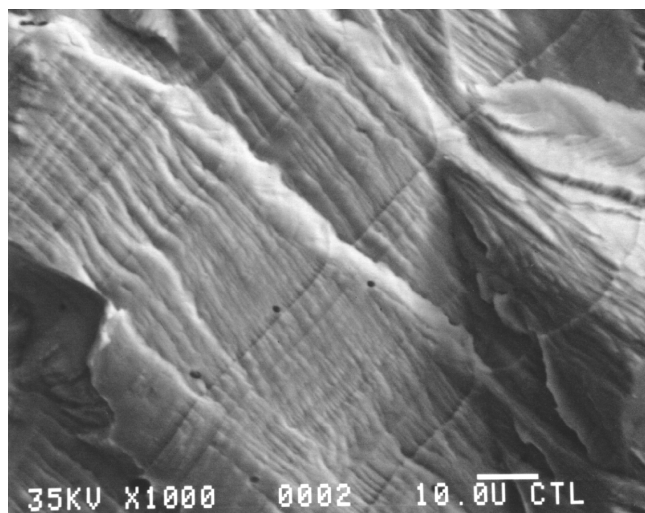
Fatigue fracture in a sucker rod.
